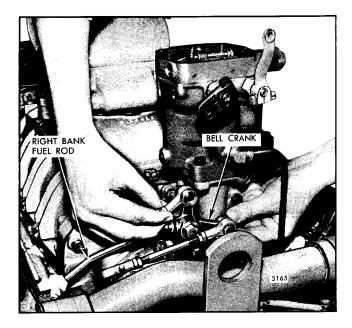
Adjusting Length of Right Cylinder Bank Fuel Rod
